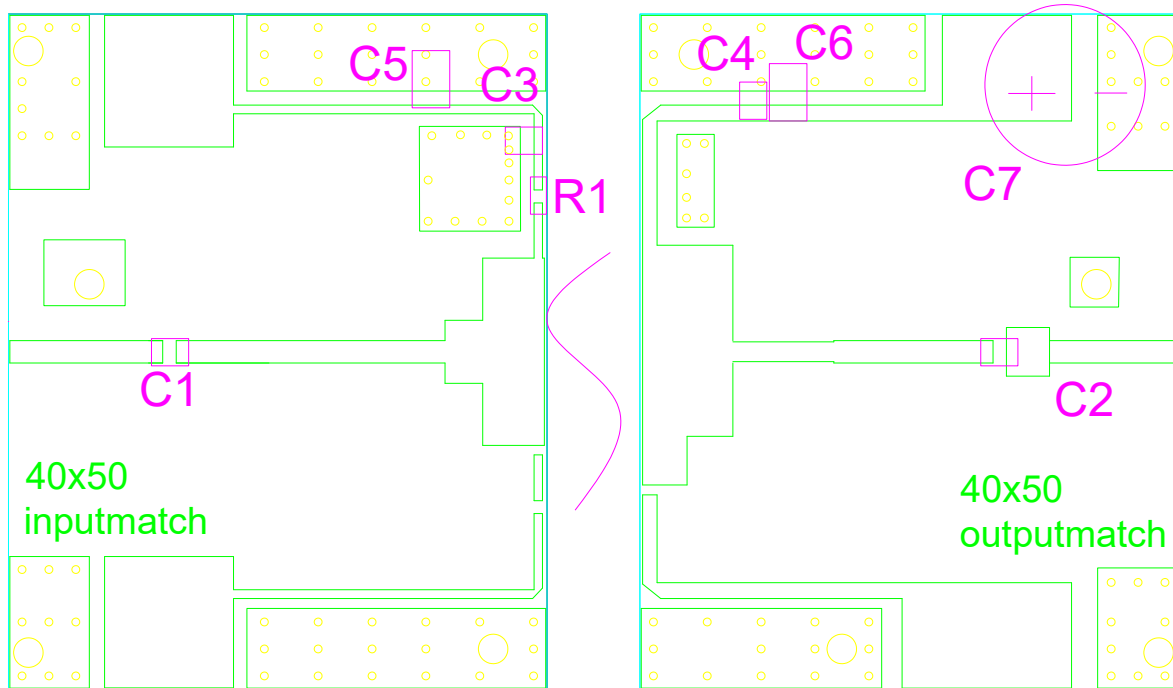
Test Circuit Component Layout (PCB RO4350B 20mils)
